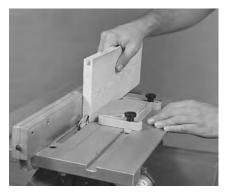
Cutting a groove for a tongue and groove joint. Be sure the stock has ample bearing surface against the insert.
